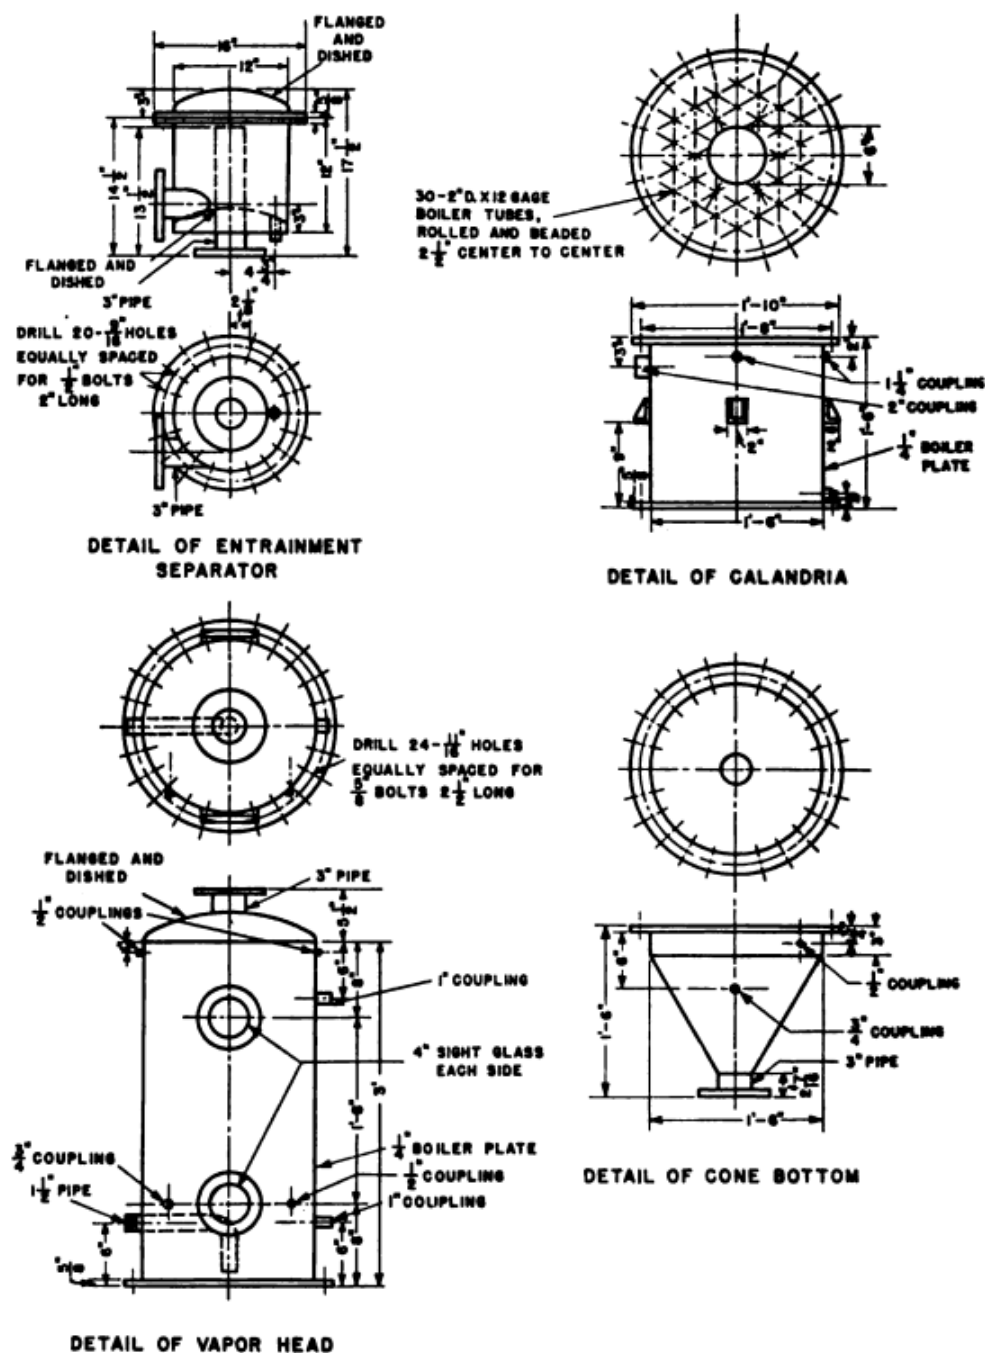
Details of Construction of Entrainment Separator, Vapor Head, Calandria, and Cone Bottom
